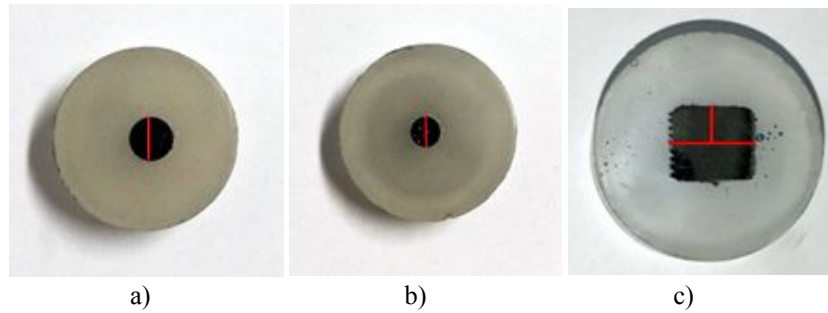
Microhardness measurements of a) transversal cross-section of conventional steel; b) transversal cross-section of SLM specimen; and c) longitudinal cross-section of SLM specimen.
